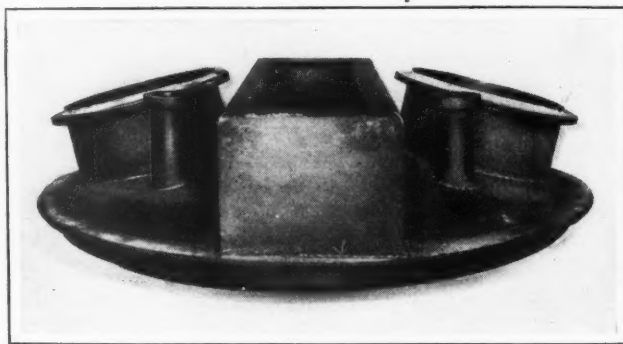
Complicated Part Welded by Use of Standard Pipe
